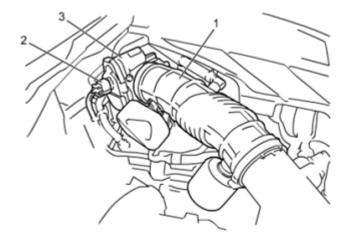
Identifying Air Cleaner Outlet Hose And Throttle Body Connector With Throttle Body Courtesy of SUZUKI OF AMERICA CORP.
